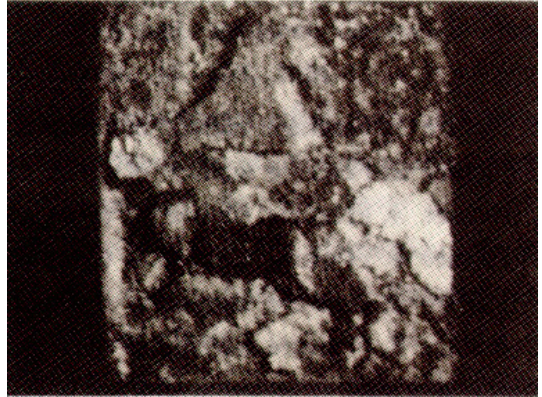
Fracture surface of infrared postsoldered Bond-on 4 specimen. (×20)
